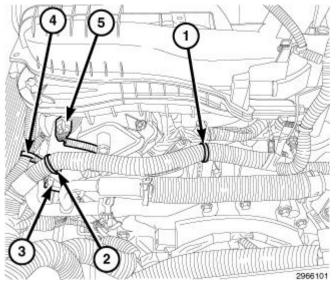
Engine Coolant Temperature (ECT) Sensor Connector, Camshaft Position (CMP) Sensor & Harness Retainers
